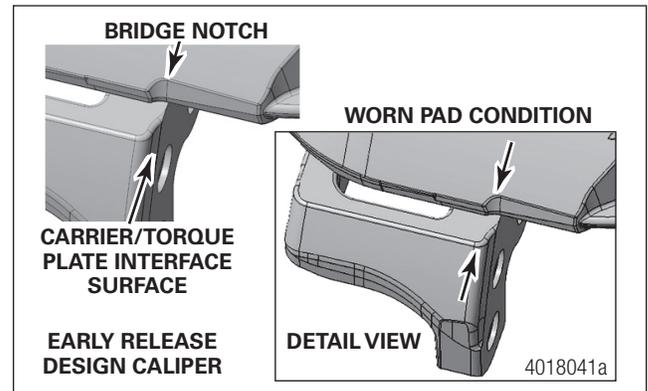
Worn Pad Condition on Early Release Design Caliper
